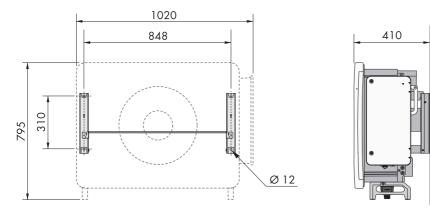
Dimensions of the mounting bracket (dimensions in mm)
